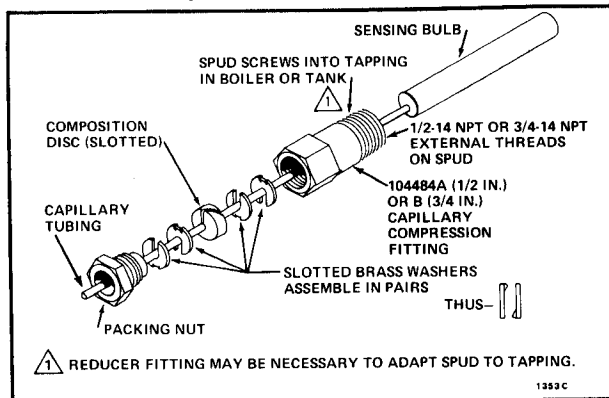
MOUNTING THE SENSING BULB USING A CAPILLARY COMPRESSION FITTING.
